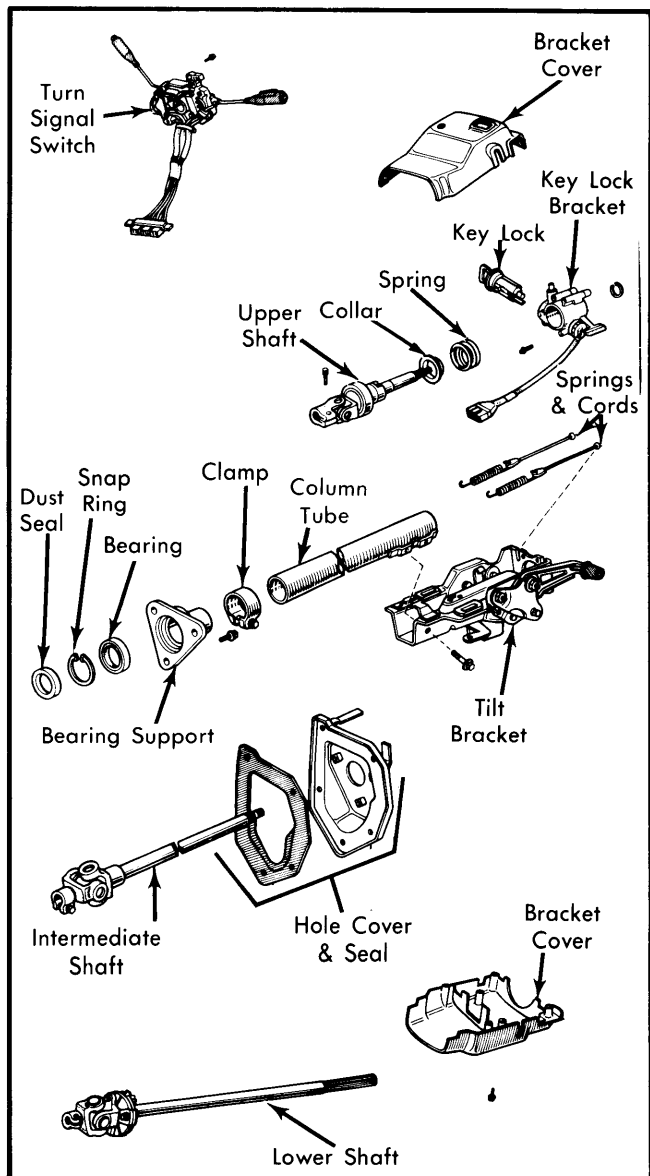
Exploded View of Pickup Tilt Wheel Steering Column
